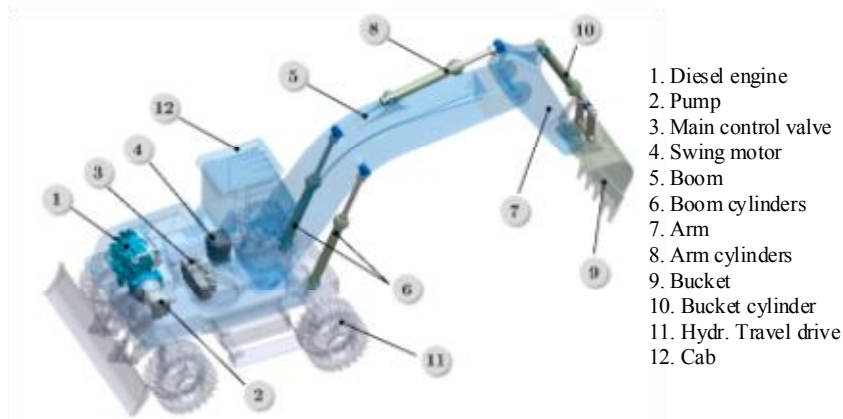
Layout of a typical hydraulic excavator [10]
